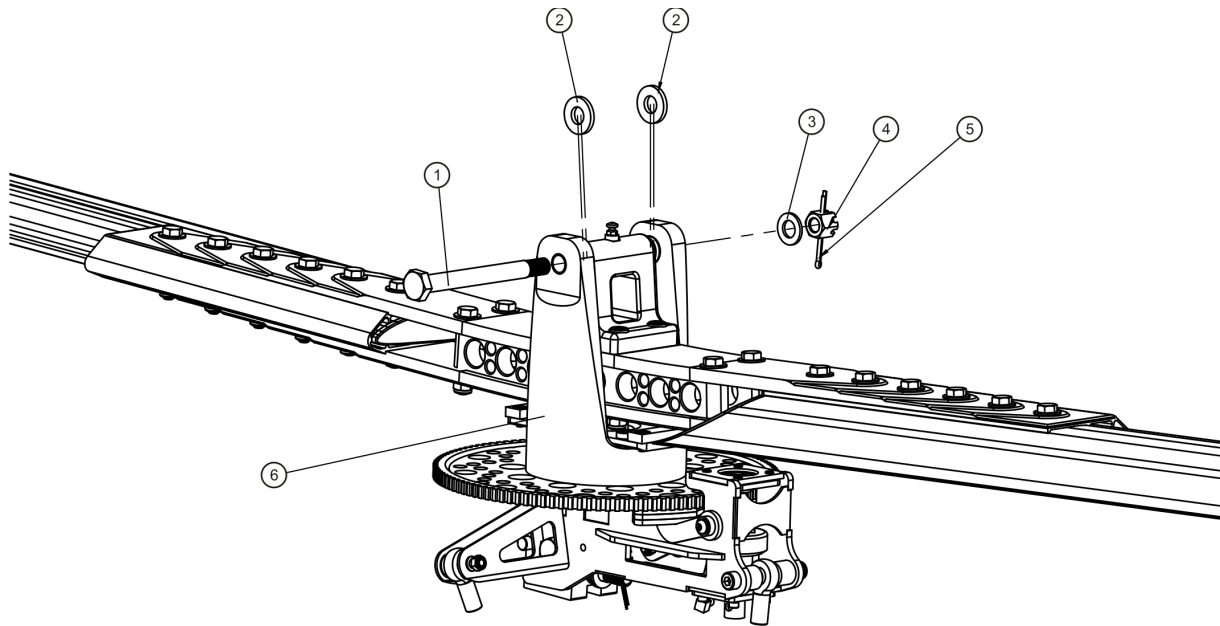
Removal rotor - teetering parts (Effectivity: RS II)
